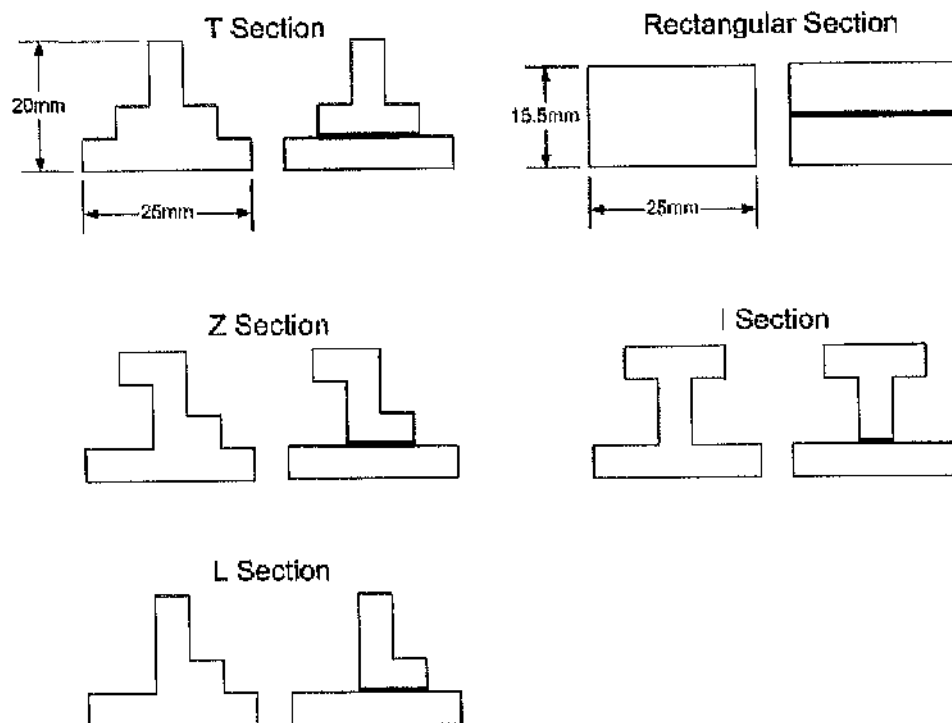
Cross section details of the solid and bonded (0.5 Adhesive Thickness) specimens.
